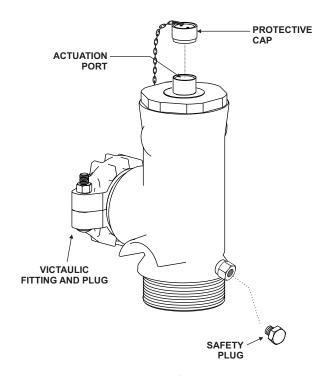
3 in. Valve General Arrangement (P/N 45-170000-001)
